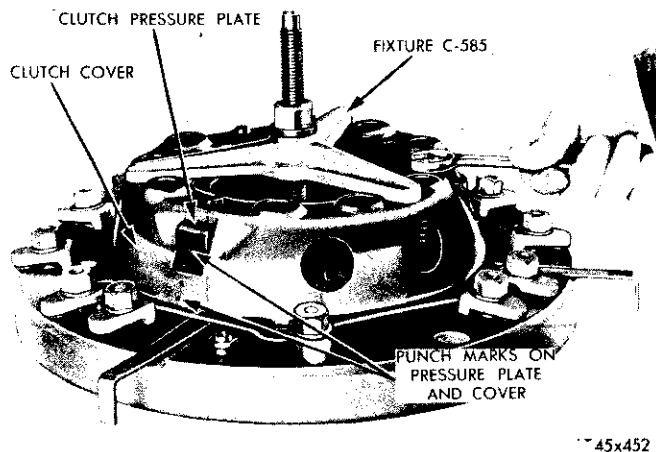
Clutch Cover and Pressure Plate Assembly in Fixture
